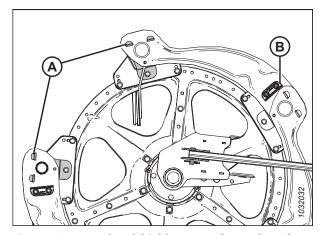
Reel Endshield Removed – Outboard Tail End
